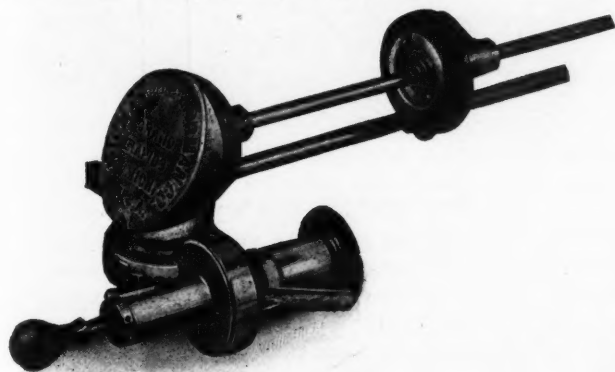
Wilmarth & Mormon Lathe Center Grinder
